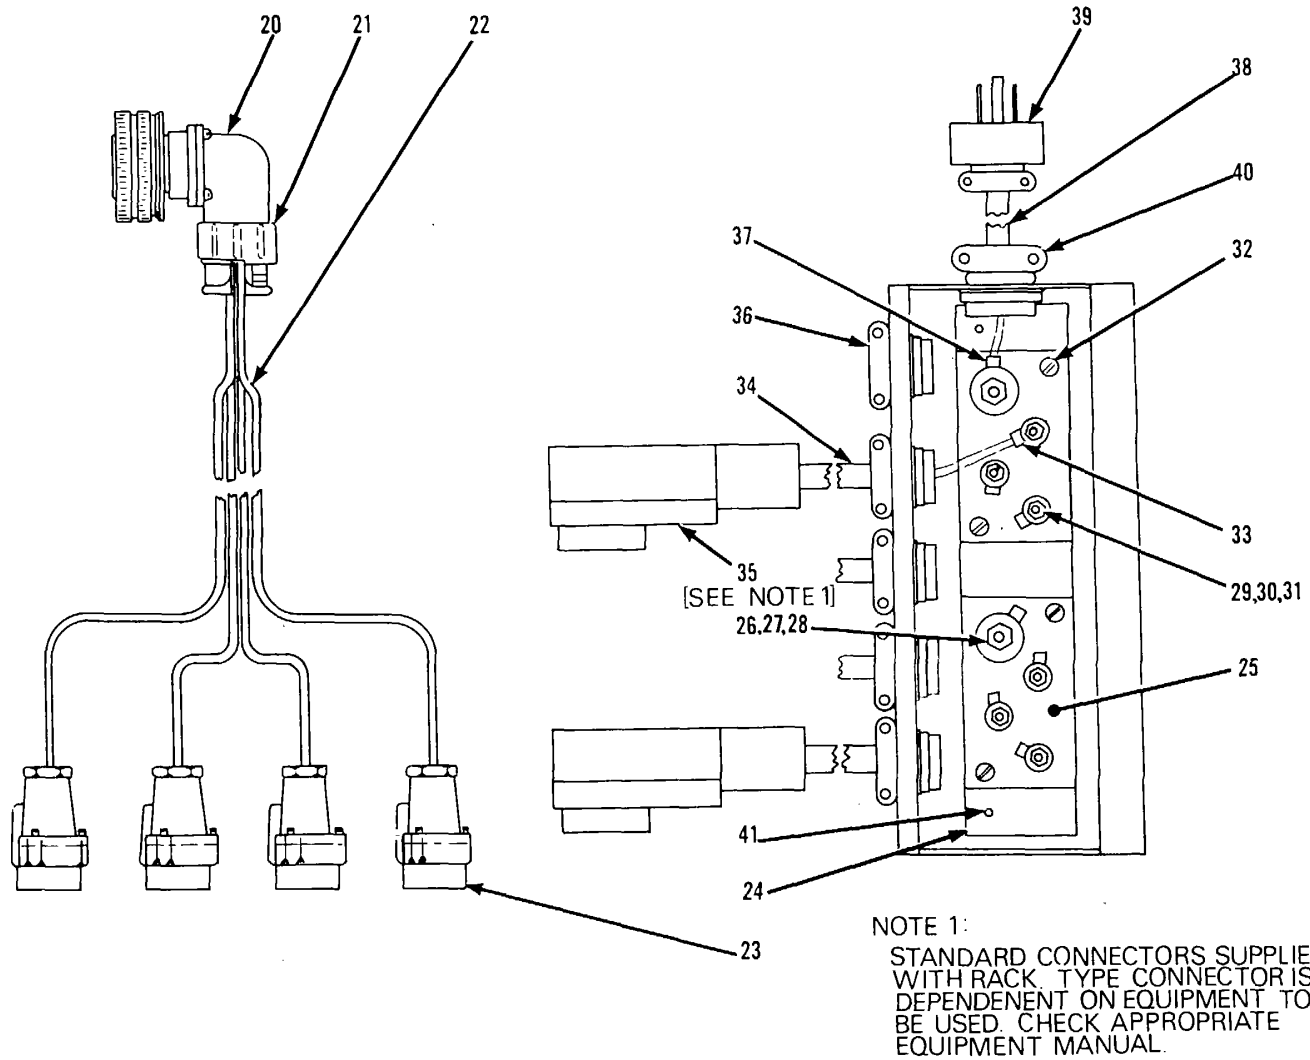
Power Distribution Box and Audio Cable Assembly
